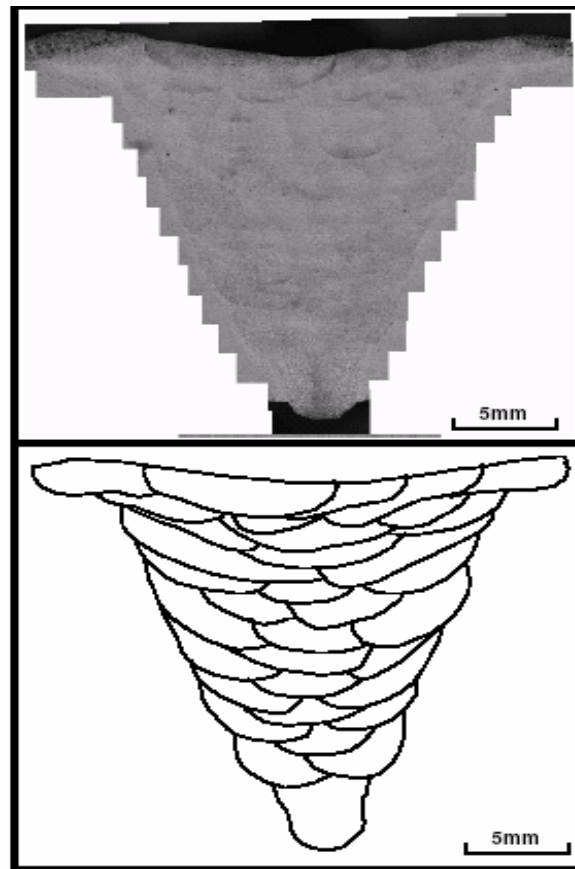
Macrostructure of cross-section of multipass weld metal using newly developed filler metal NF1 with La addition (Nishimoto et al. 2004).
